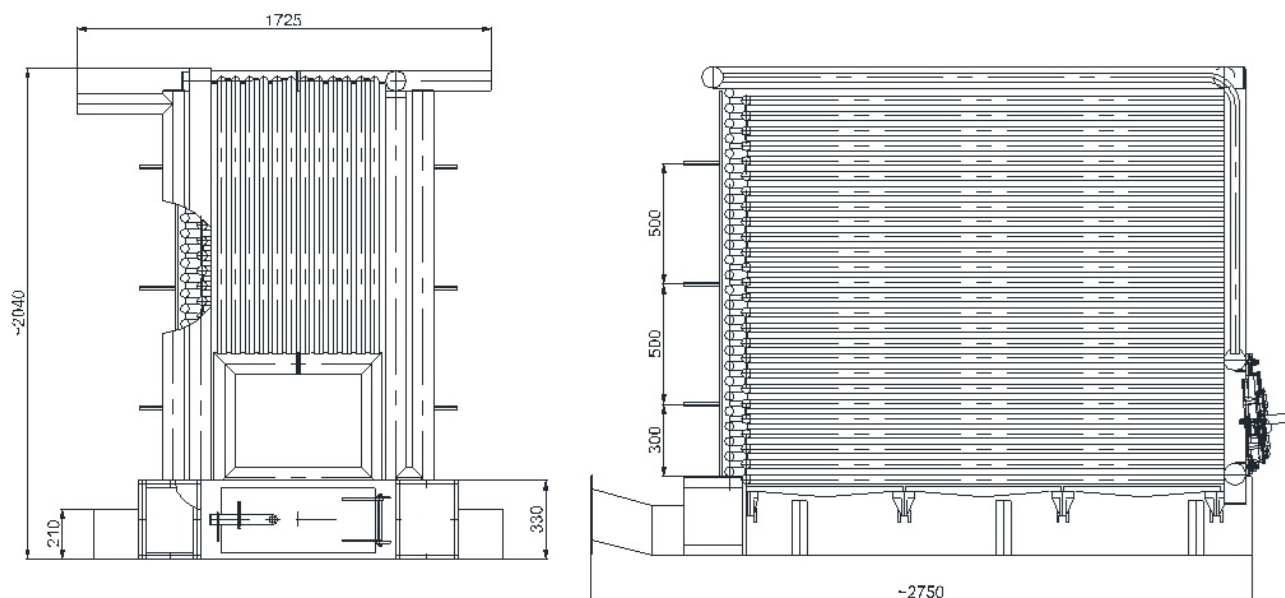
Front and side view of the hot water solid fuel boiler KSVR-0.43
